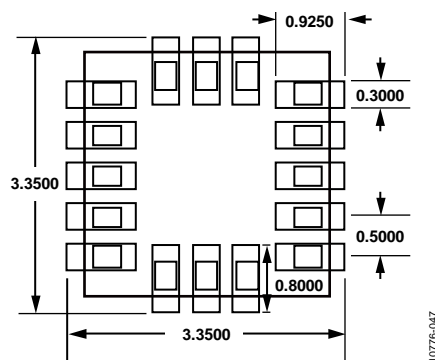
Recommended PCB Land Pattern (Dimensions shown in millimeters)
